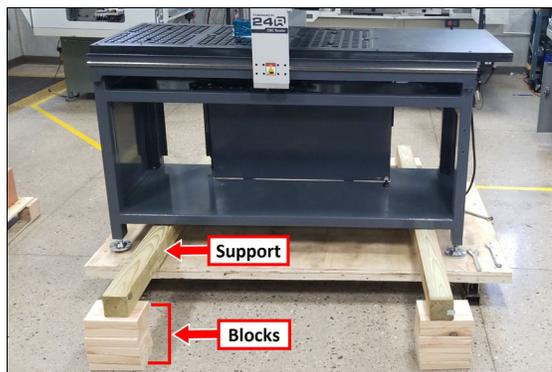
Boards arranged under the machine to prepare for pallet removal.
